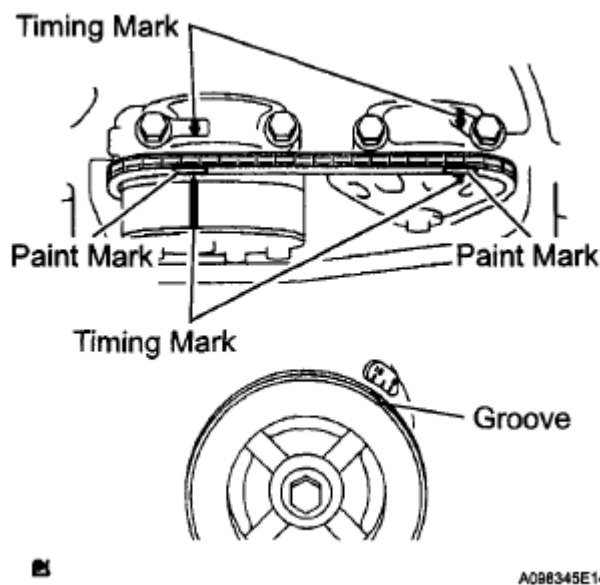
Identifying Timing Marks On Camshaft Timing Gear And Camshaft Timing Sprocket
